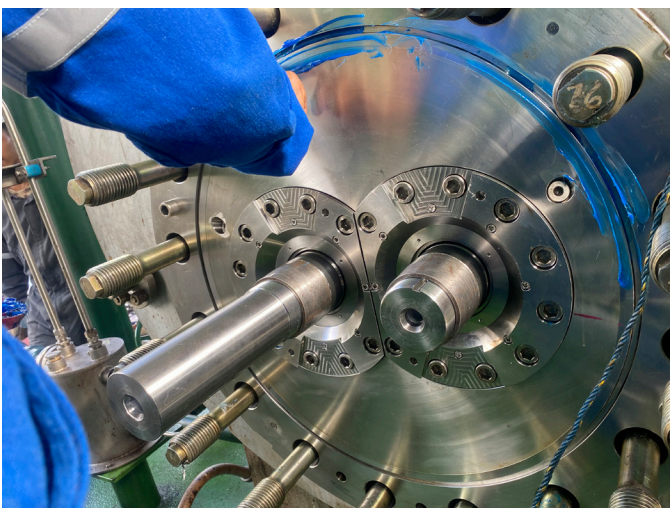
Flexaseal seals installed side-by-side on the twin-shaft pump
